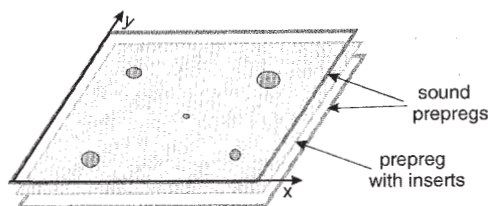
Sketch of glass/epoxy specimens with circular inserts (GFRP-C).
